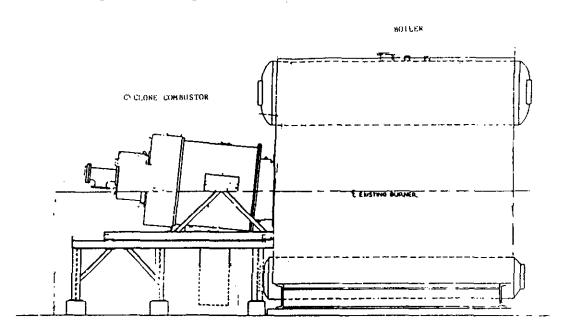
Drawing of the 20 MMBtu/hr Coal Tech Combustor Attached to an Oil/Gas Boiler
